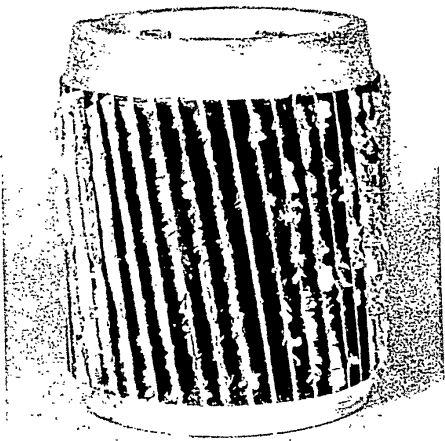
Contact Corrosion at a Centrifuged Aluminium Rotor
